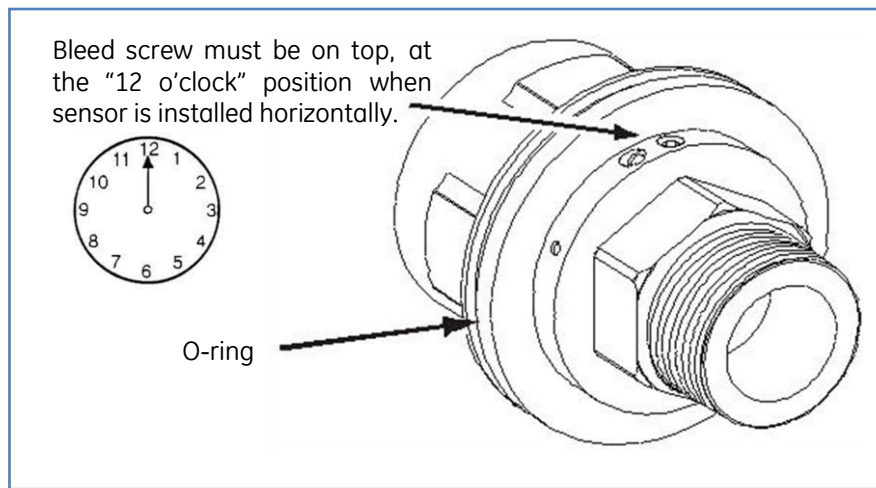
The Bleed Screw Must Be on Top, at the 12 O'clock Position
